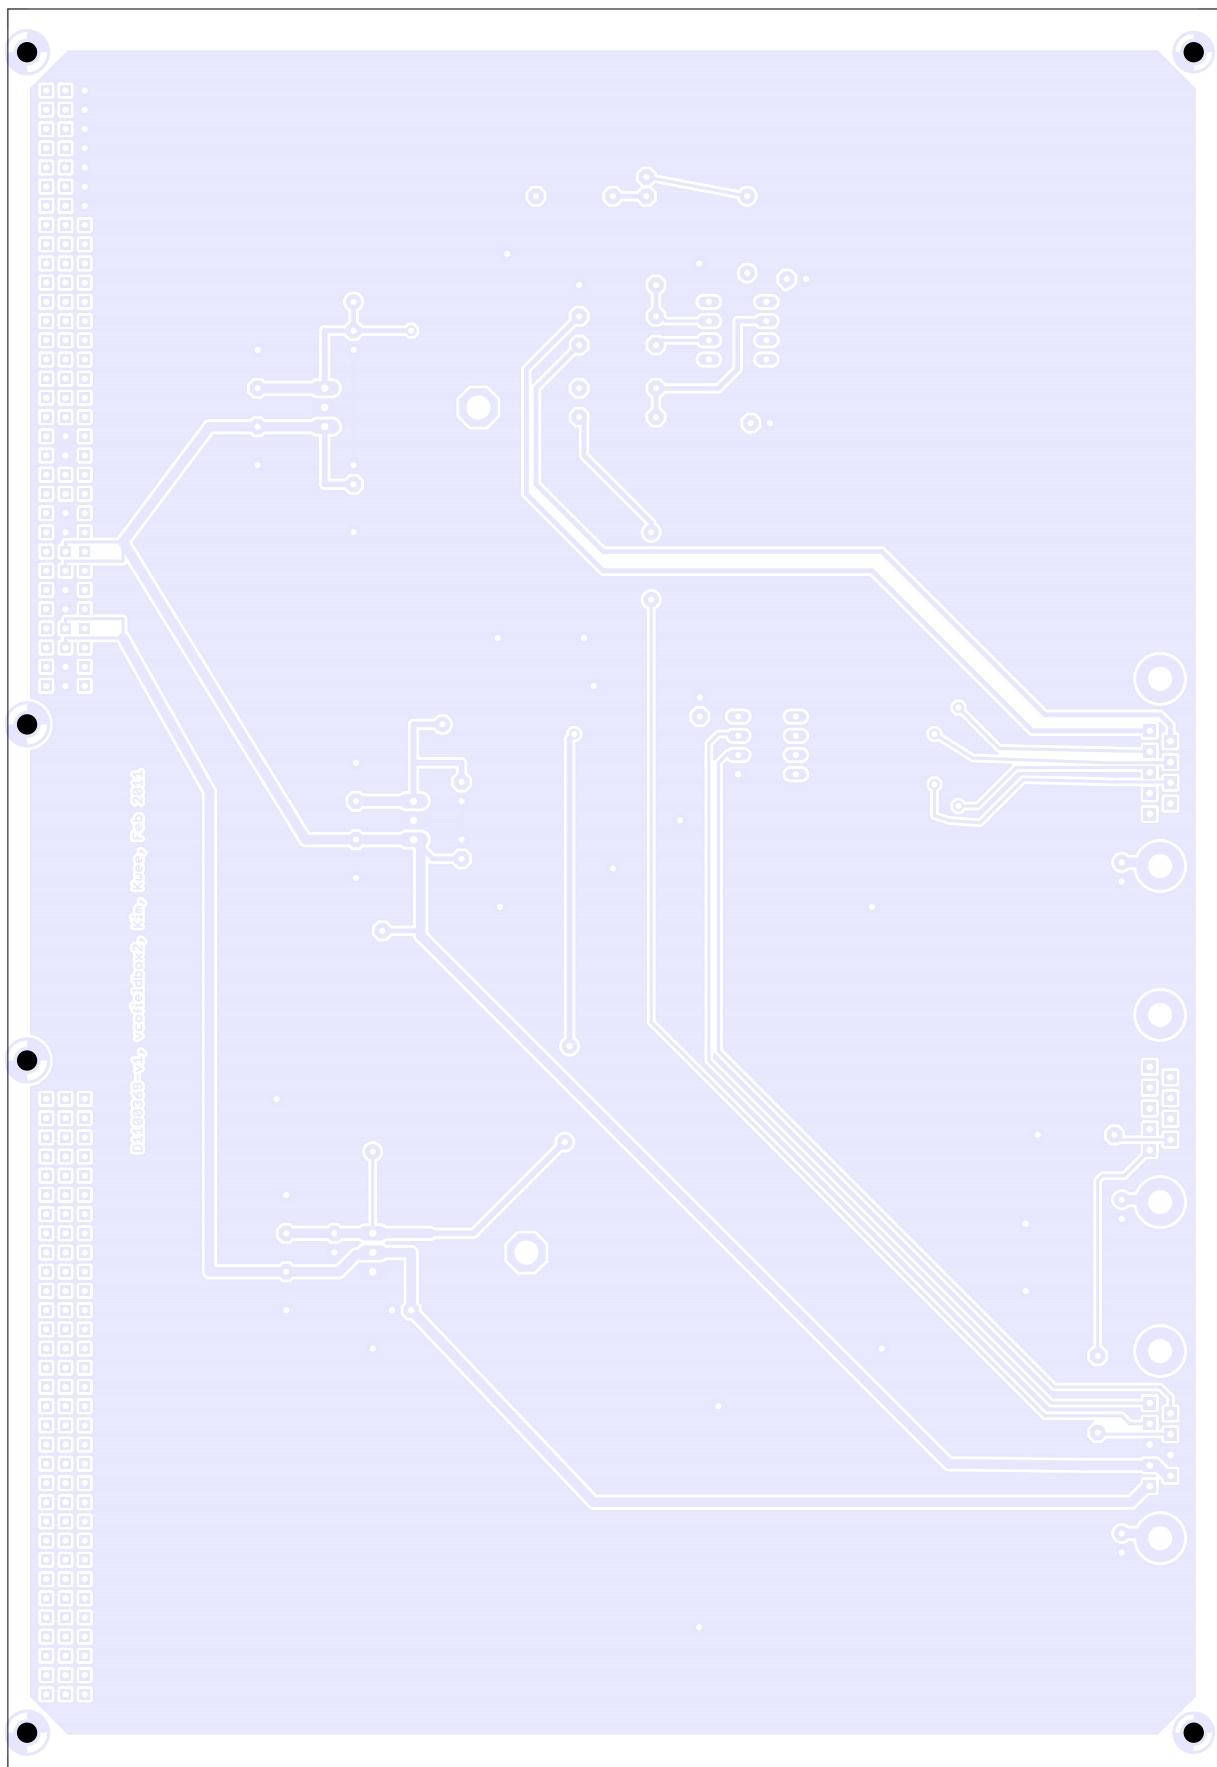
Board top view showing connectors, test points, vias and wired components
